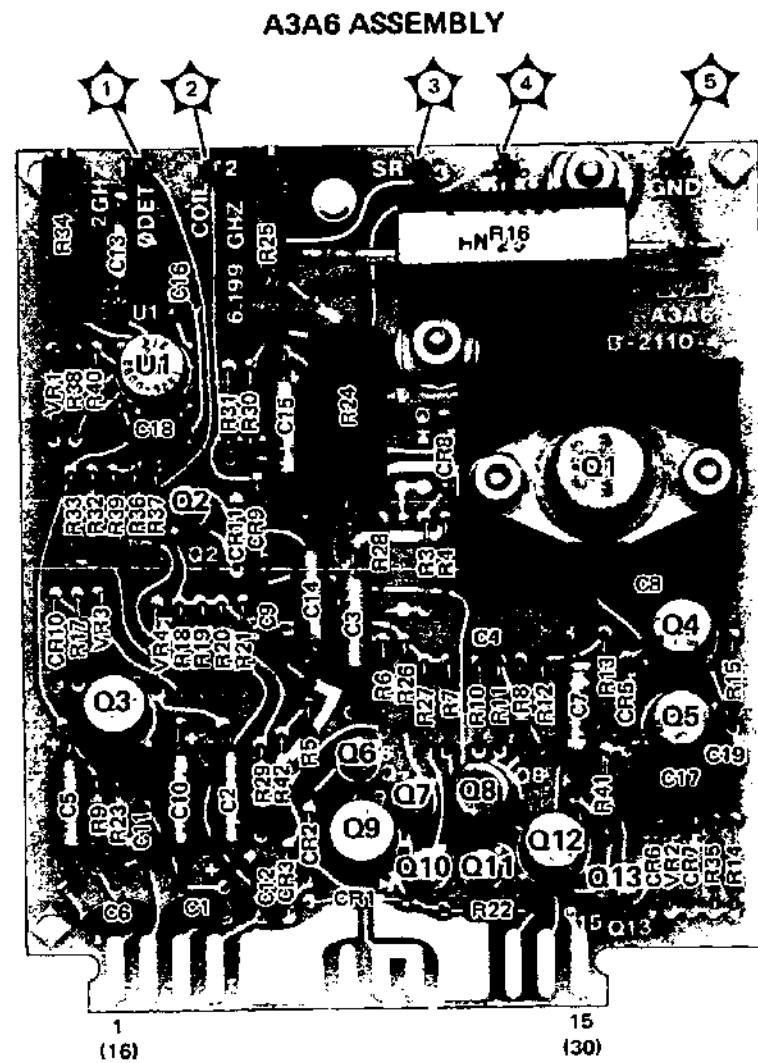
A3A6 YTO Driver Assembly Component and Test Point Locations
